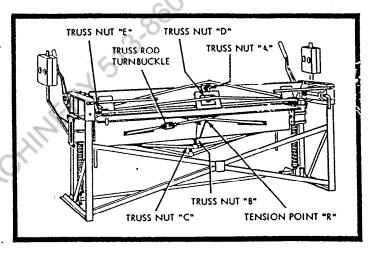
Rear View of Brake Showing Tension Adjustment Points
